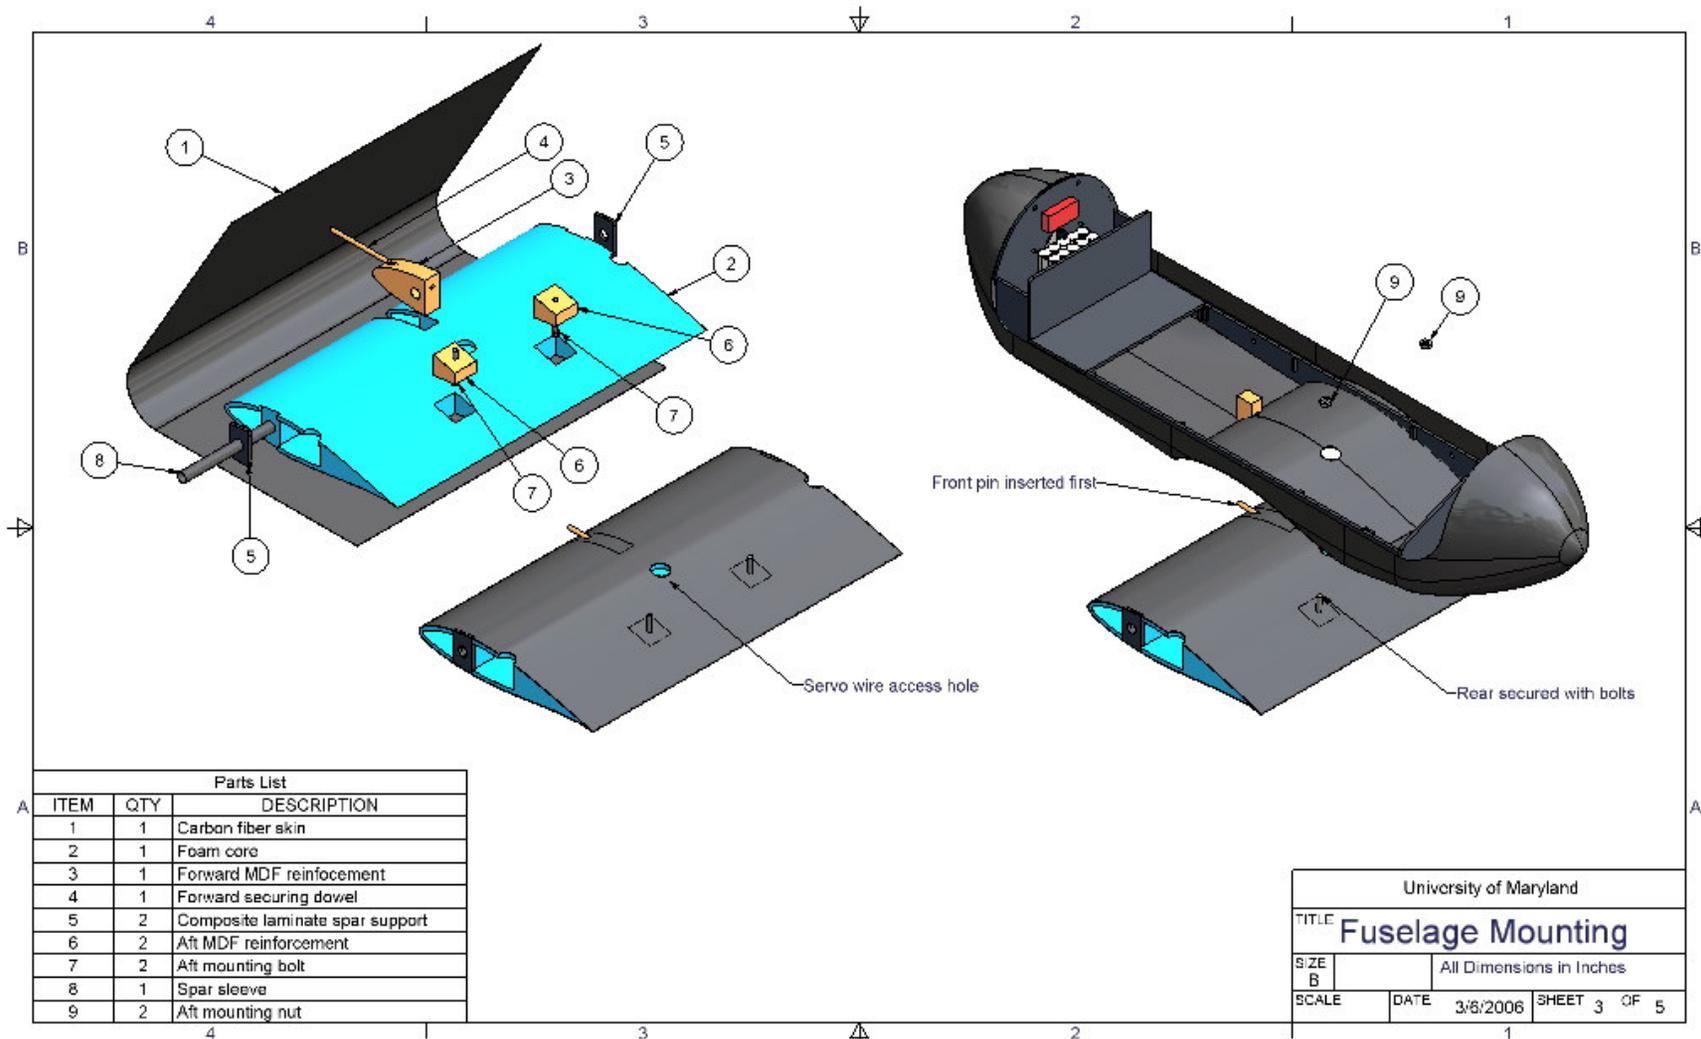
Detailed CAD Drawing – wing center-section assembly and mounting.
